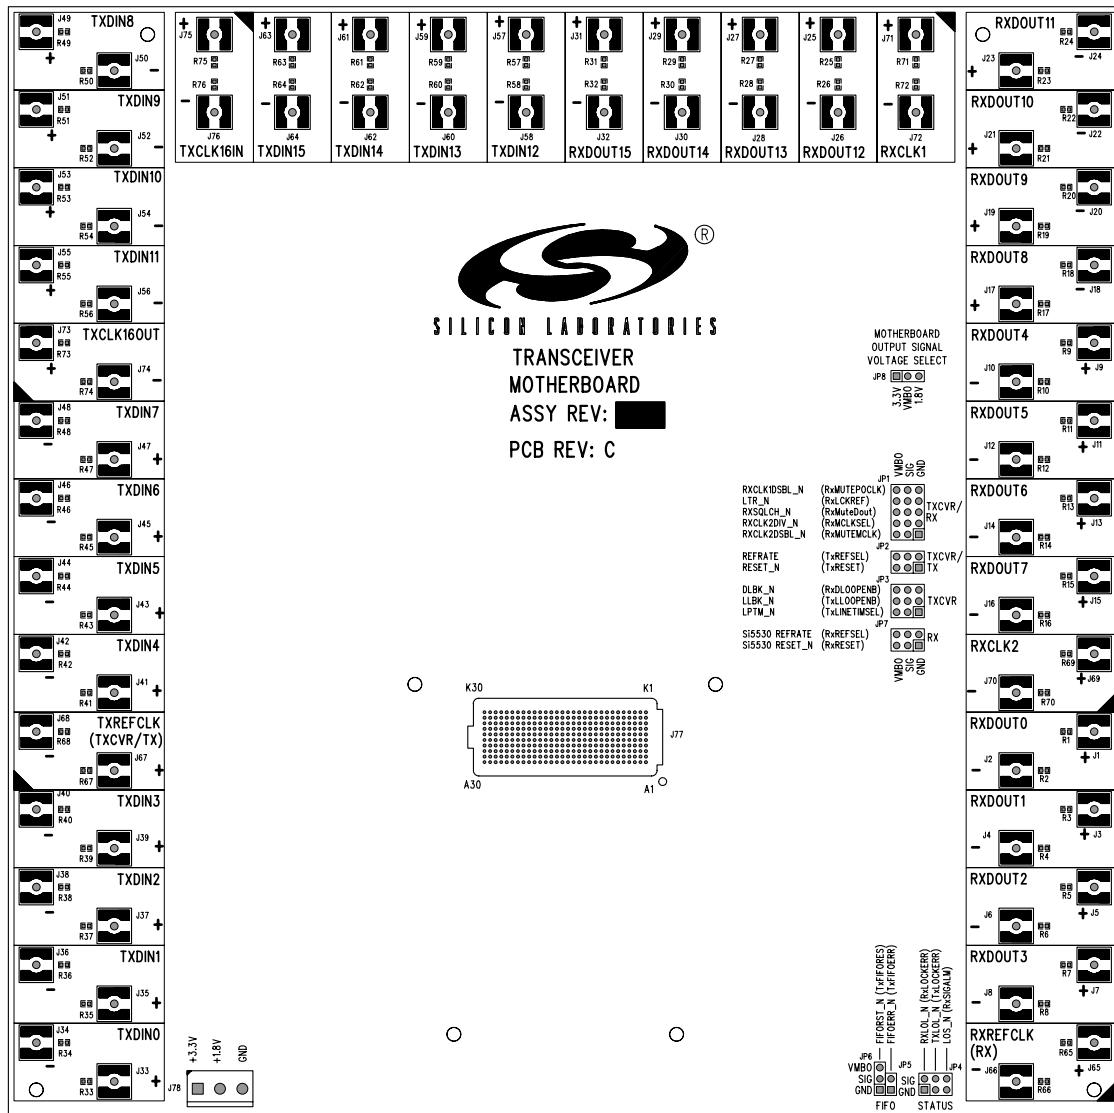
Component Side Assembly (Optional Full-Duplex Motherboard)
